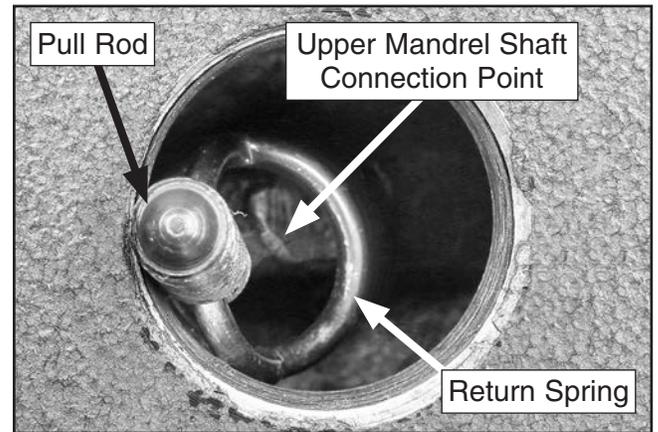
Return spring with pull rod installed on upper mandrel shaft (located in headstock).
